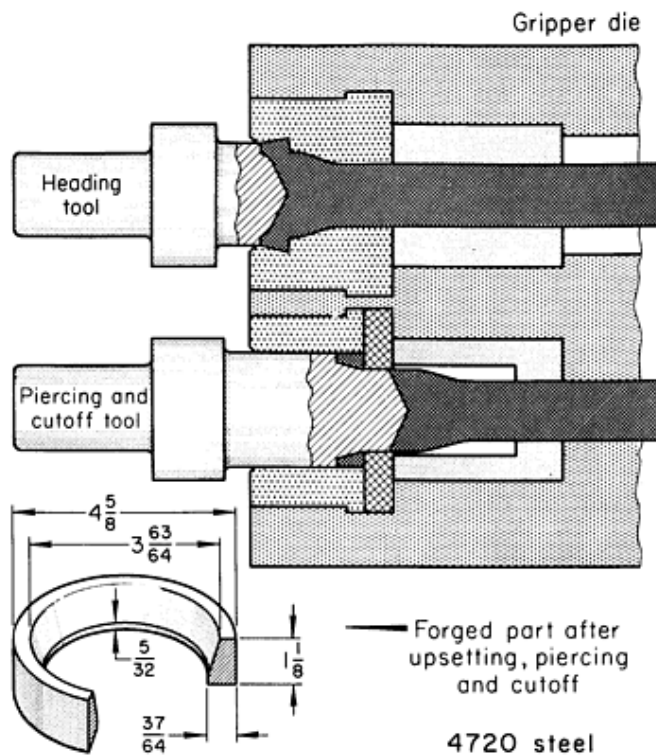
Tooling setup for producing bearing races from 3-m (10-ft) lengths of 64-mm (2 -in.) diam bar by upsetting, piercing, and cut off in two passes. Dimensions given in inches.
